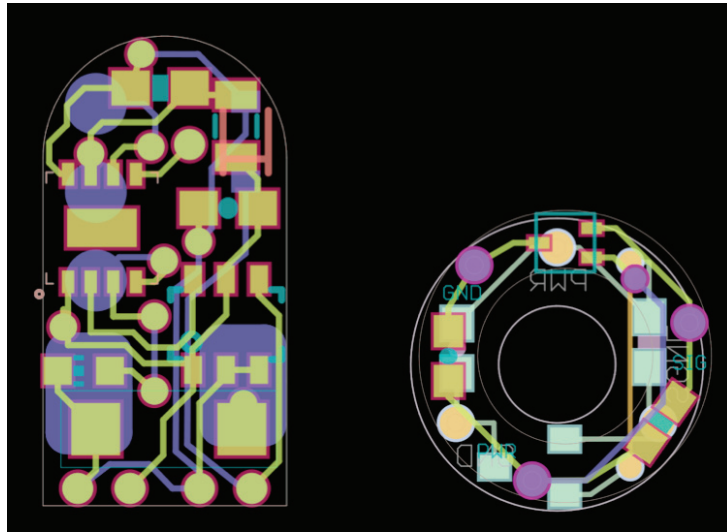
Component layout for Embodiment A primary (left) and secondary (right) rigid PCBs
